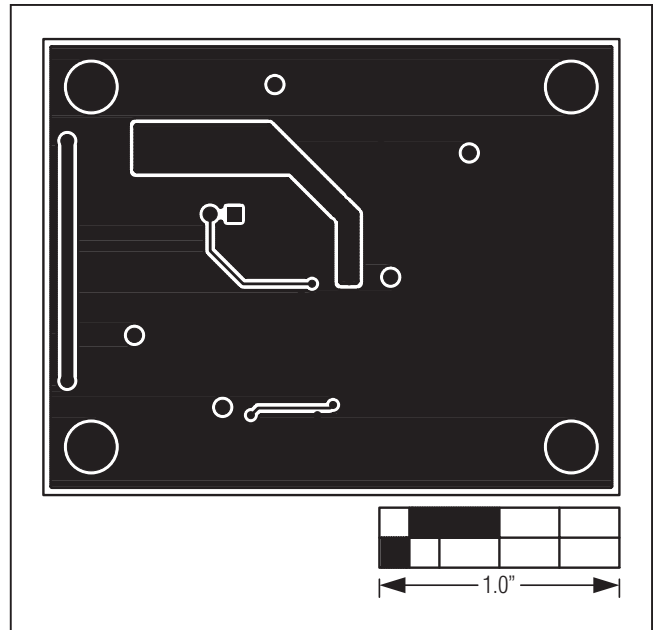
MAX16907 EV Kit PCB Layout—Solder Side
